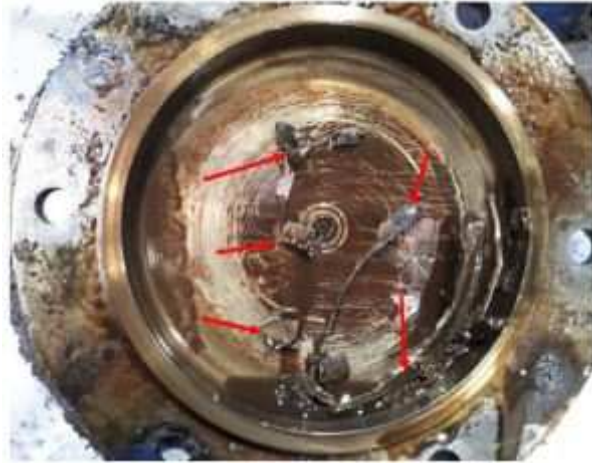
of the failed tab washer found in the bearing cap from the 1st Intermediate shaft.
